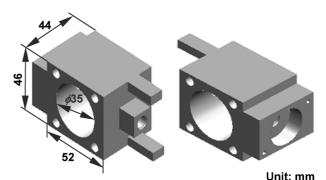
Throttle Body by Solid 3D-CAD (KU-0004 Formula Car)
